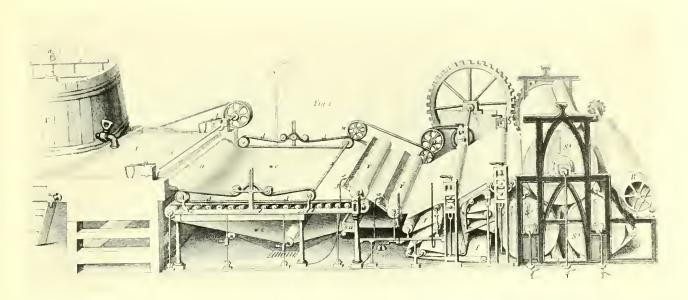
Fourdrinier paper machine. Dilute pulp flows at left onto the endless wire mold (we). As the upper half of the mold moves to the right, excess water drains through the mold, leaving a continuously formed length of paper. The paper is transferred to couching rolls, an endless felt, and finally to steam-heated drying drums and a paper-reel at the right-hand end of the machine. From Charles Tomlinson, ed., Cyclopaedia of Useful Arts and Manufactures, 2 vols. (London, 1852–1854).
